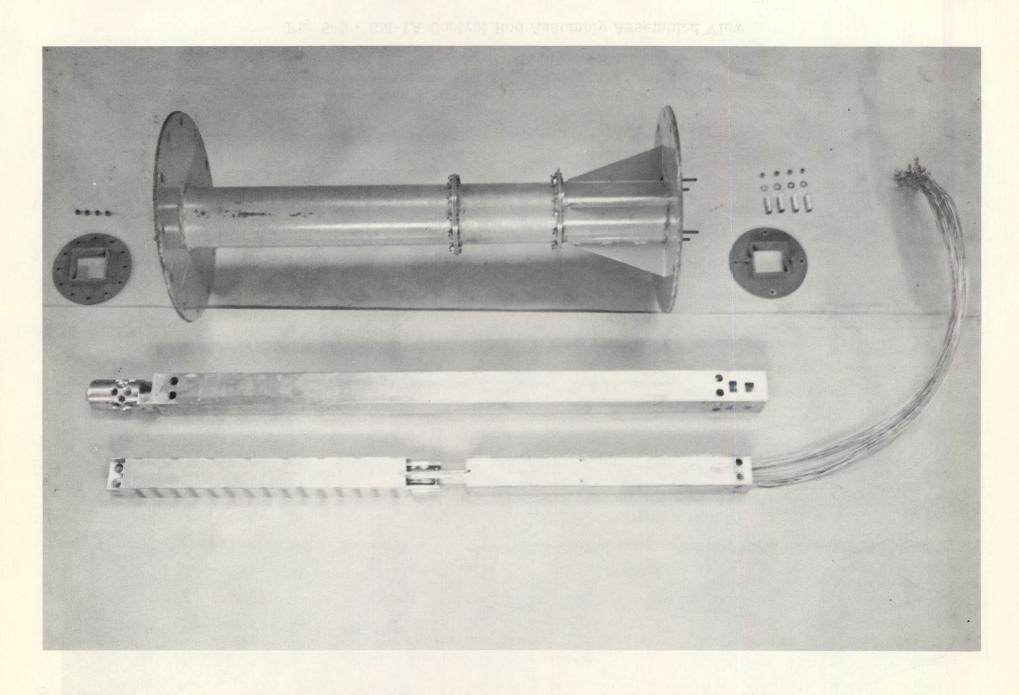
Control Rod Assembly and Test Section - Exploded View
